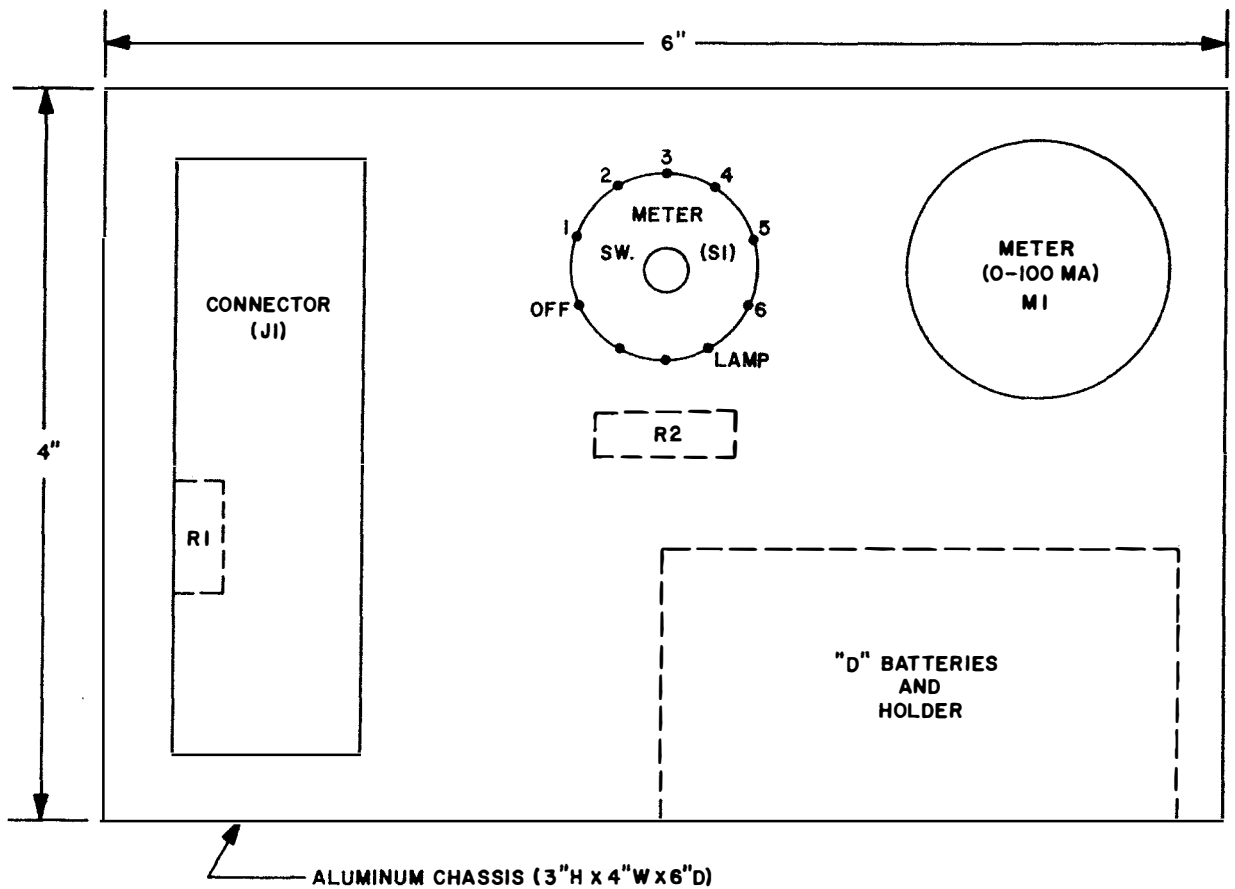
Switch-Stack Assembly Test Set, Arrangement Plan
